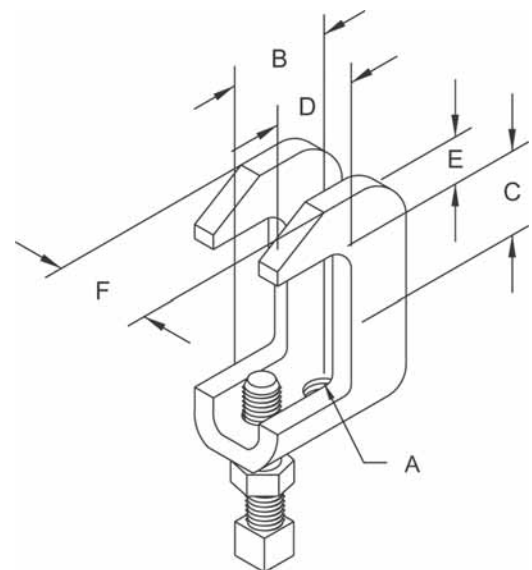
R - Retrofit Capable Beam Clamp Retaining Strap
